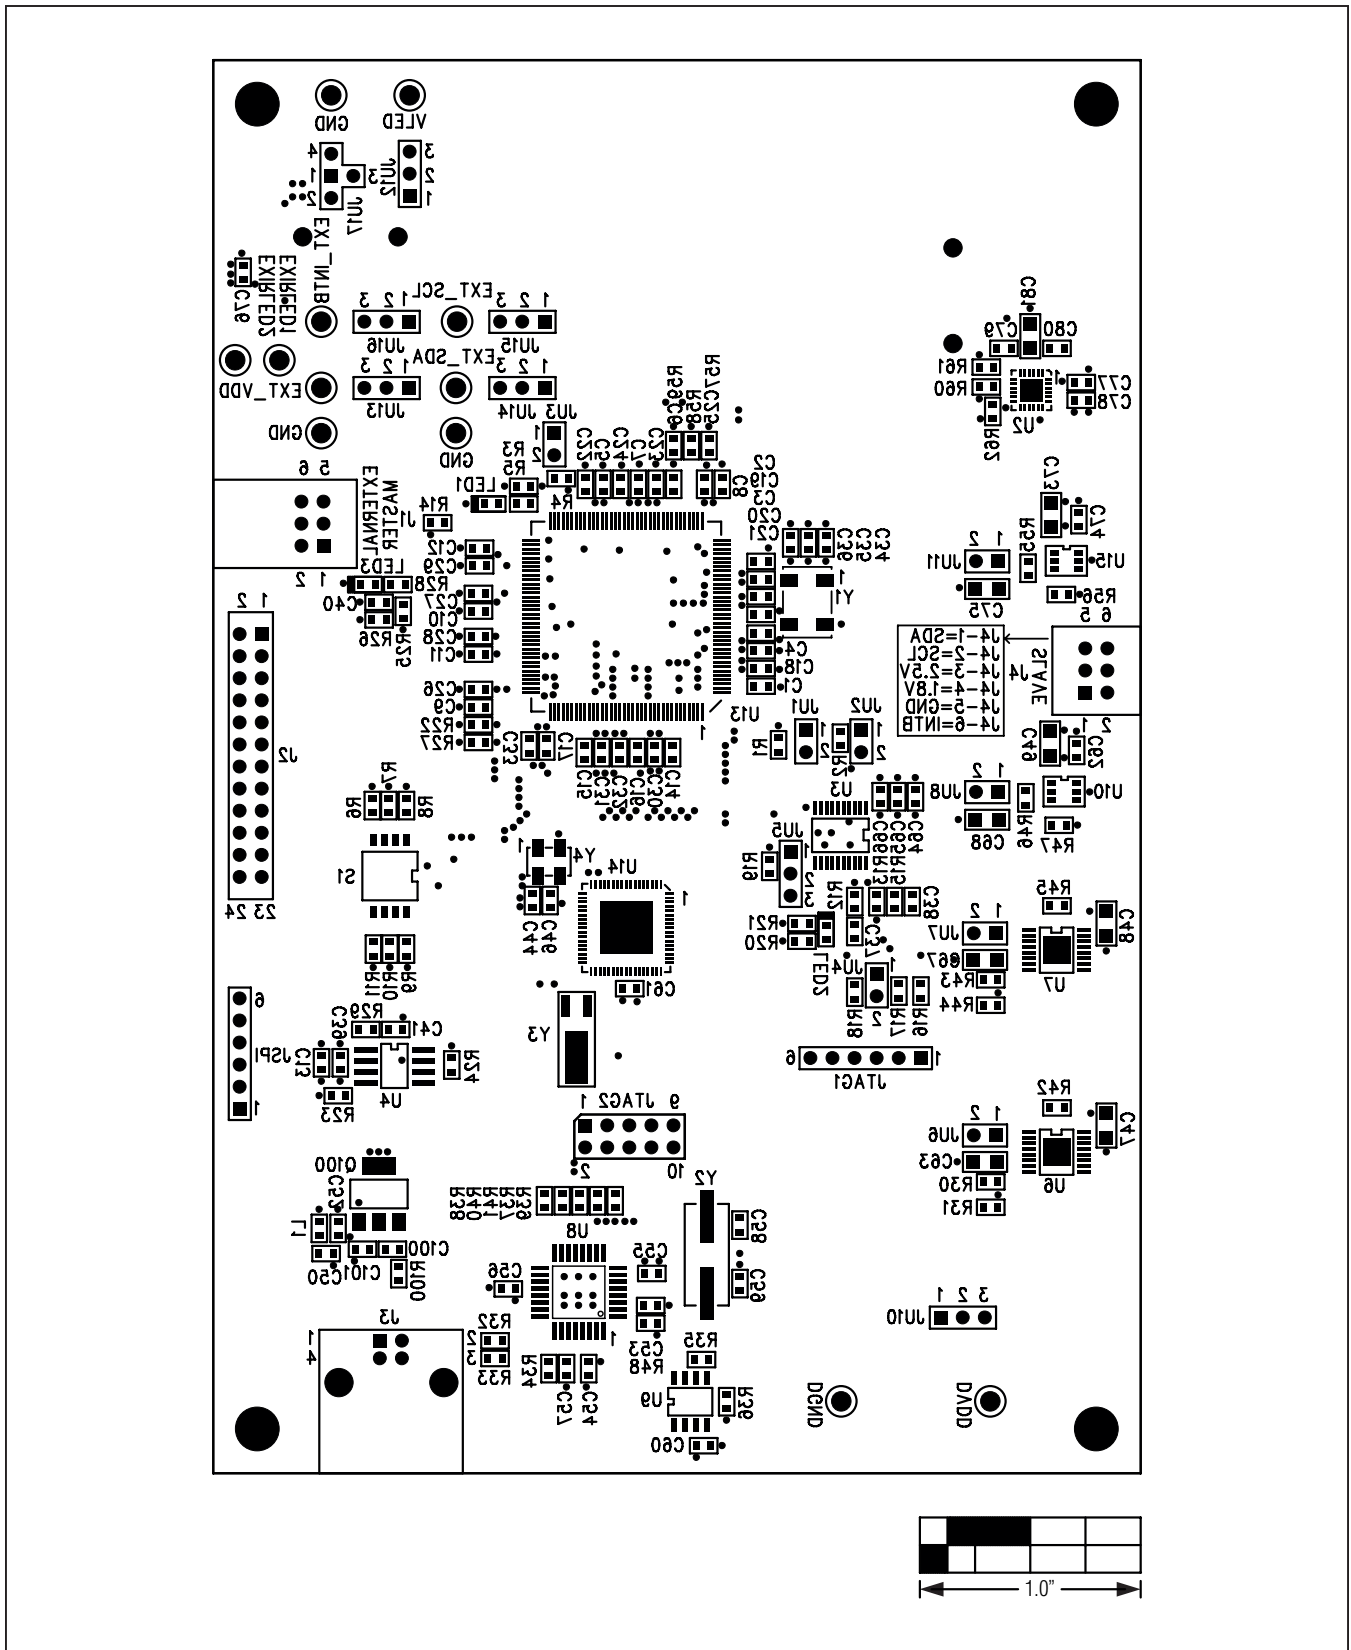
MAX44000 EV Kit Component Placement Guide—Bottom
